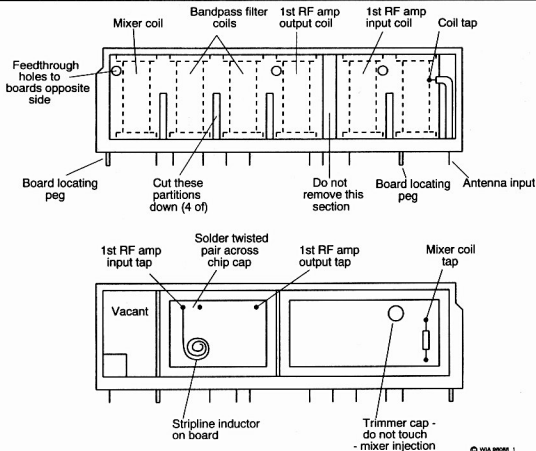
(a) - Receiver front end - mixer module. Drawings not to scale. Re-sleeve all tap tails with existing tubing to prevent shorting to earth.
